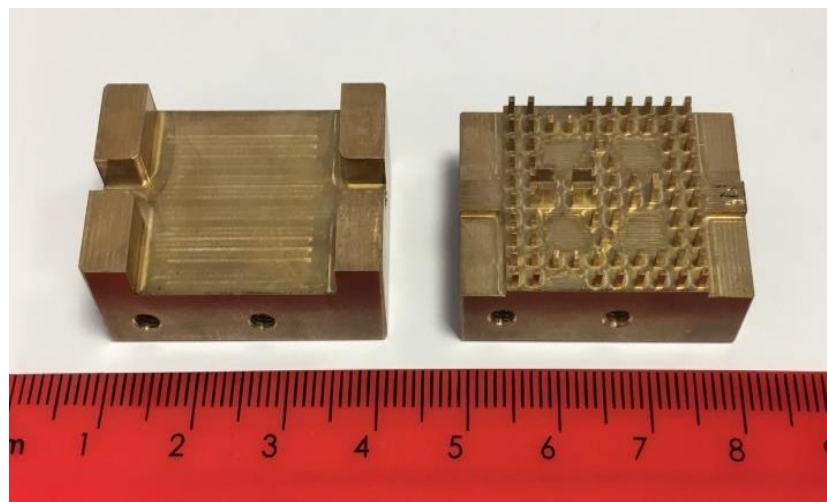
Photo of the fabricated top (left) and bottom (right) plates of the brass metal machined BPF prototype.
